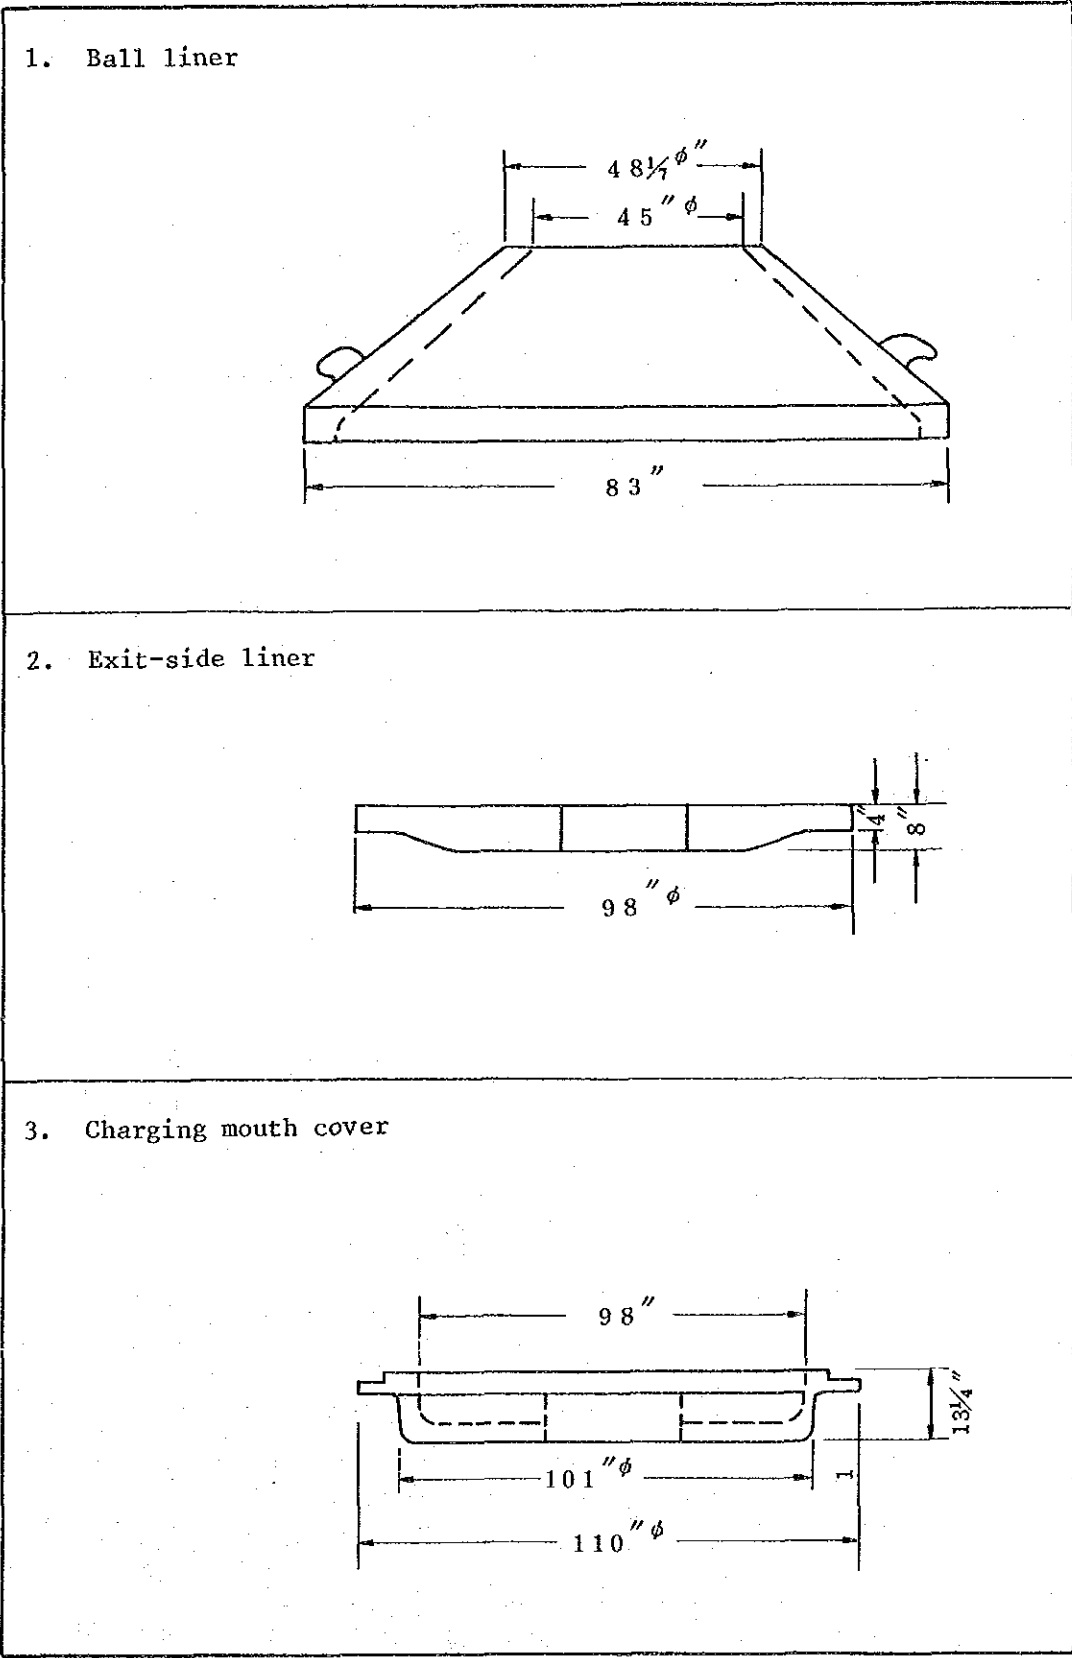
/7 Outline drawings of representative Foundry products -1
